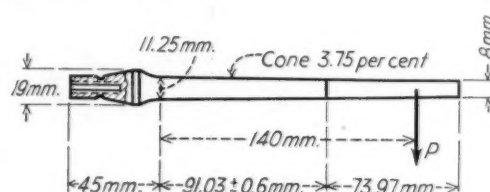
Standard Test Specimen of the French Air Ministry.
